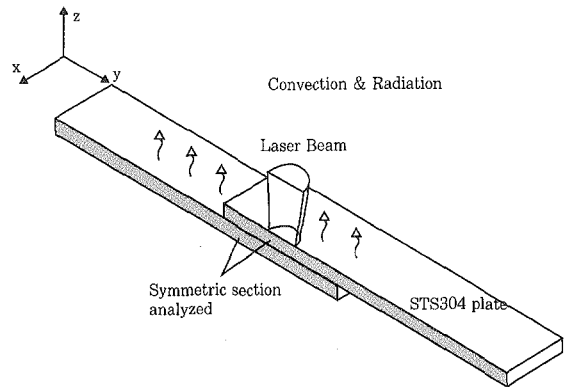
Symmetric physical model for thermal analysis of laser spot welding
